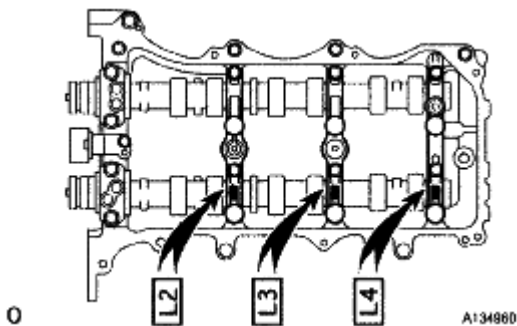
Identifying Marks And Numbers On Camshaft Bearing Caps
